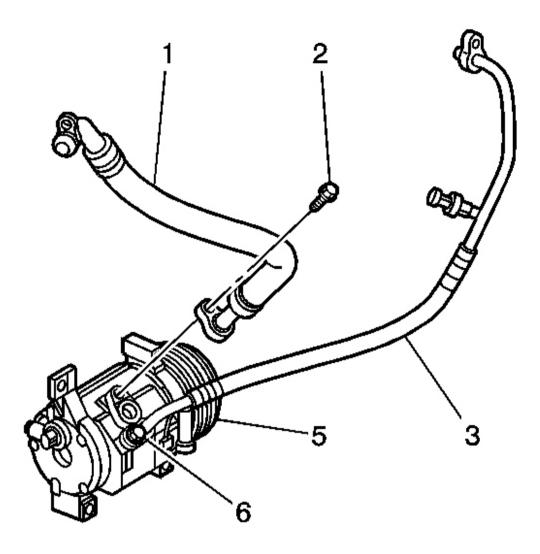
Discharge Hose & A/C Compressor Courtesy of GENERAL MOTORS CORP.
